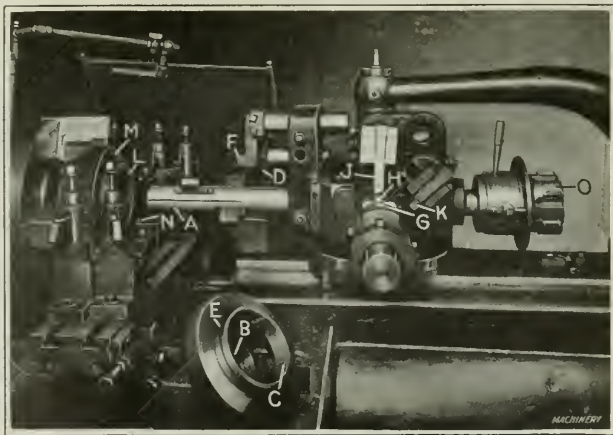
Turret Lathe equipped with Tooling for machining Leader Nuts for Pipe Thread Chasers
